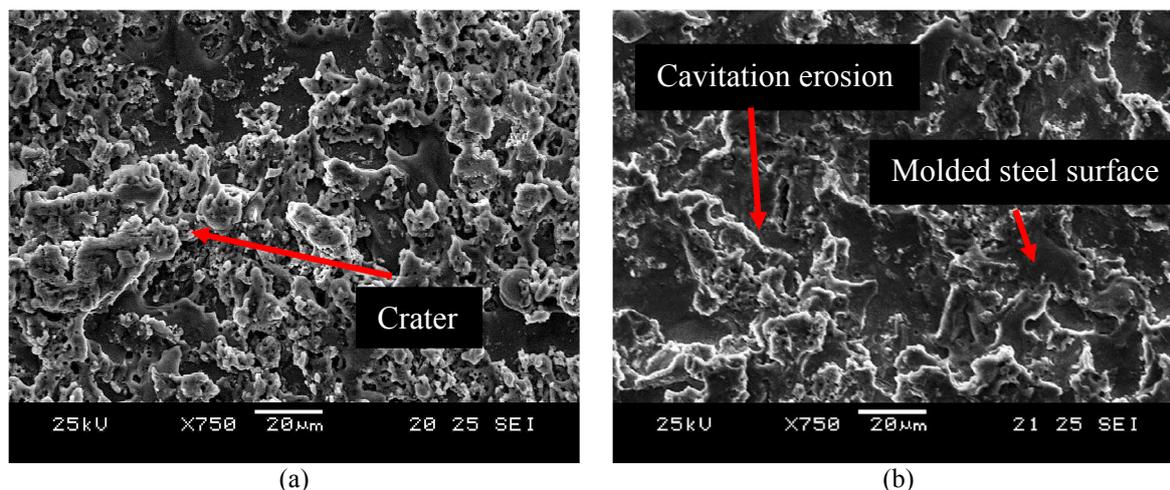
(a) EDM cut surface of SAE 304 stainless steel (b) surface after USM at T=70°C
